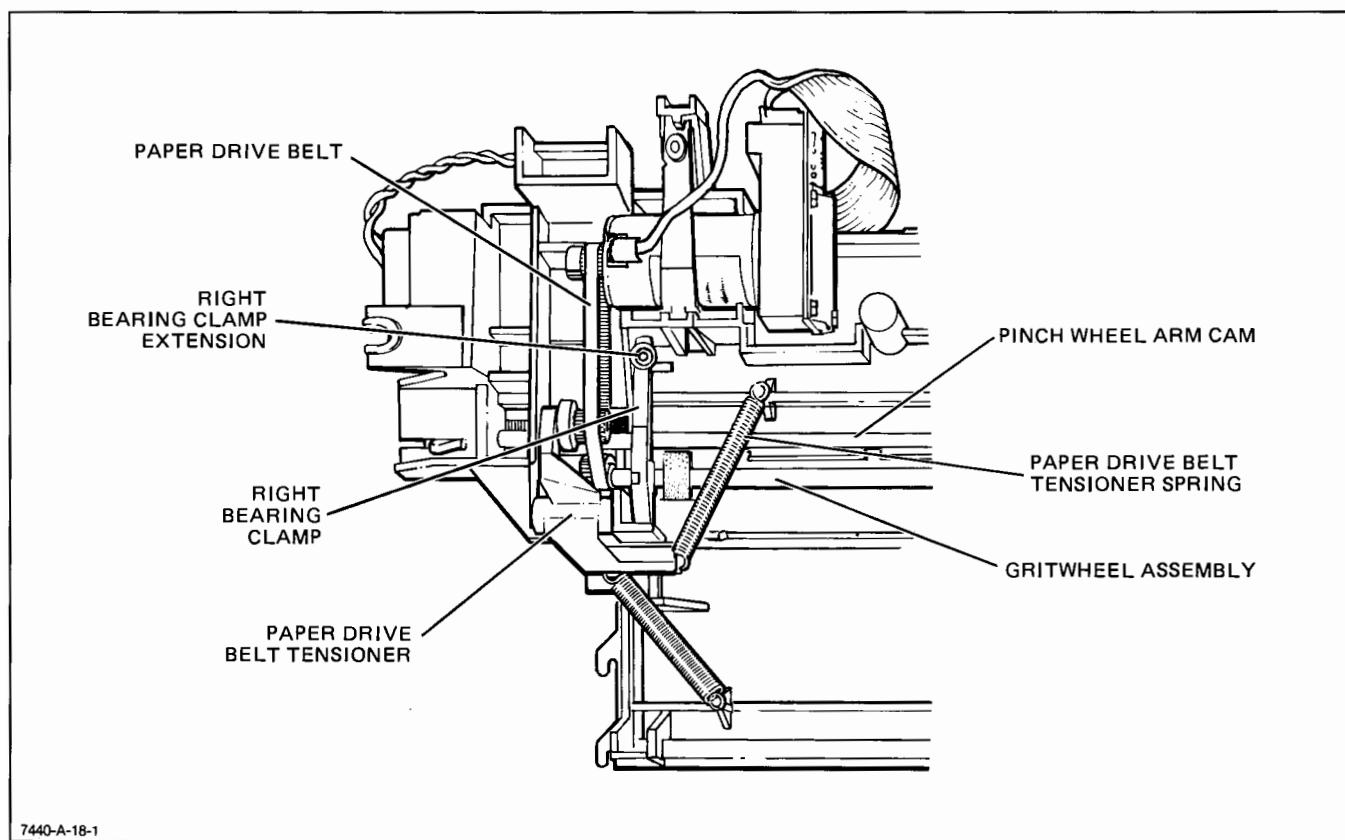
Grit Wheel Assembly Removal, Detail B
